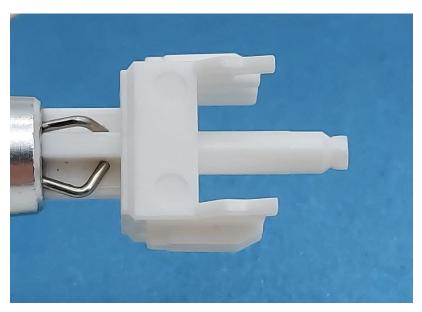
Large front plate mold circles on Naevy V1.5 stem.
